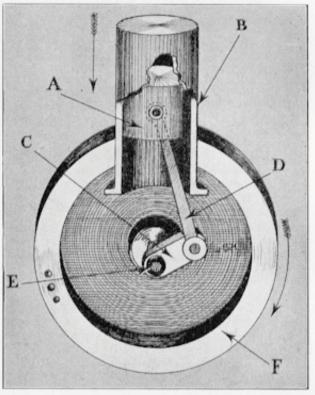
Diagram Illustrating How a Piston (A), Sliding in a Cylinder (B), Rotates the Flywheel (F)
